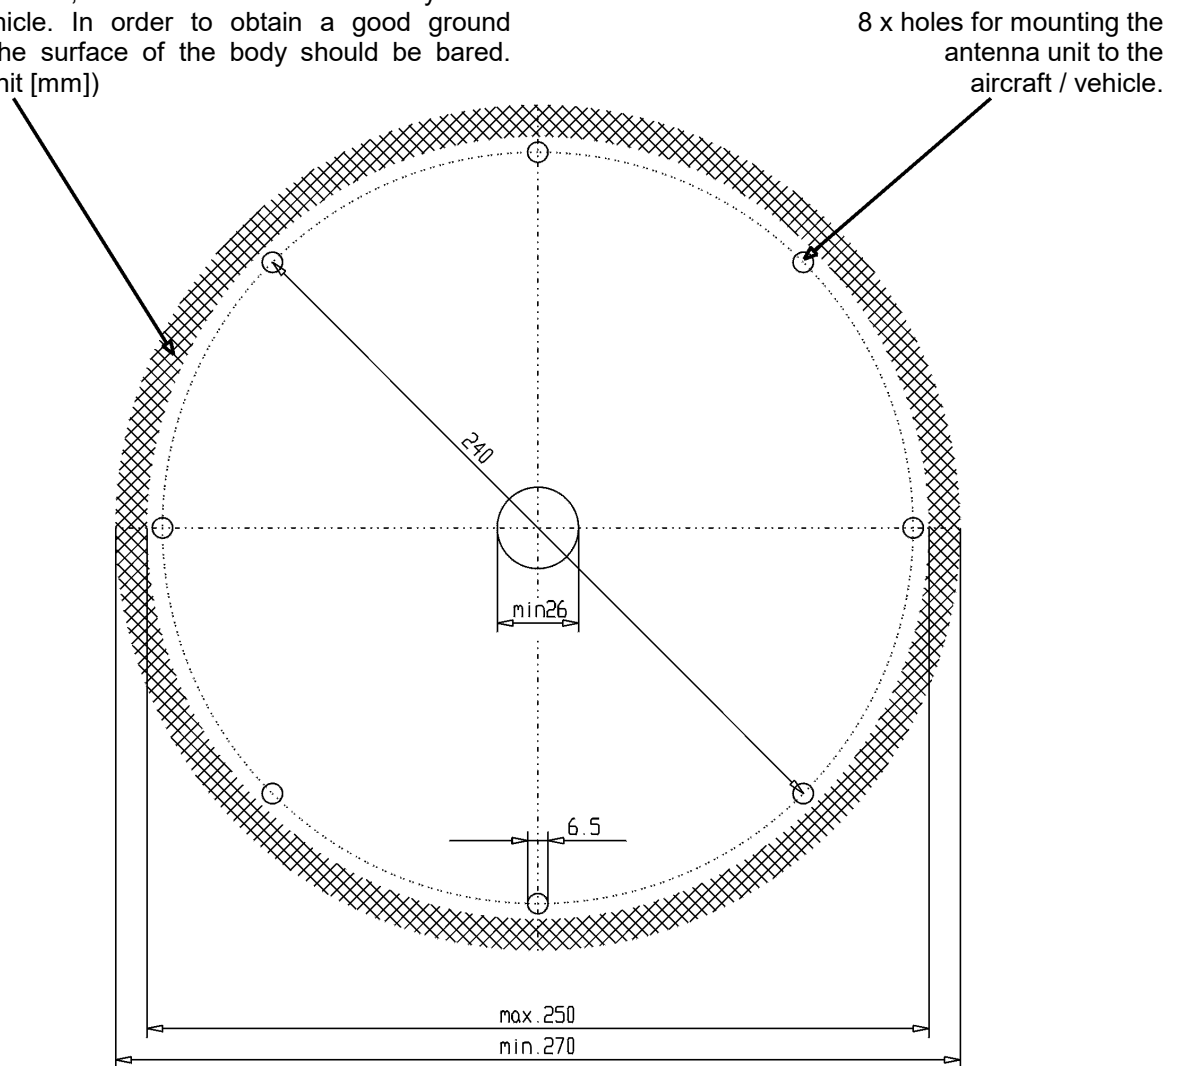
Antenna Mounting Drawing, all dimensions are in [mm]
